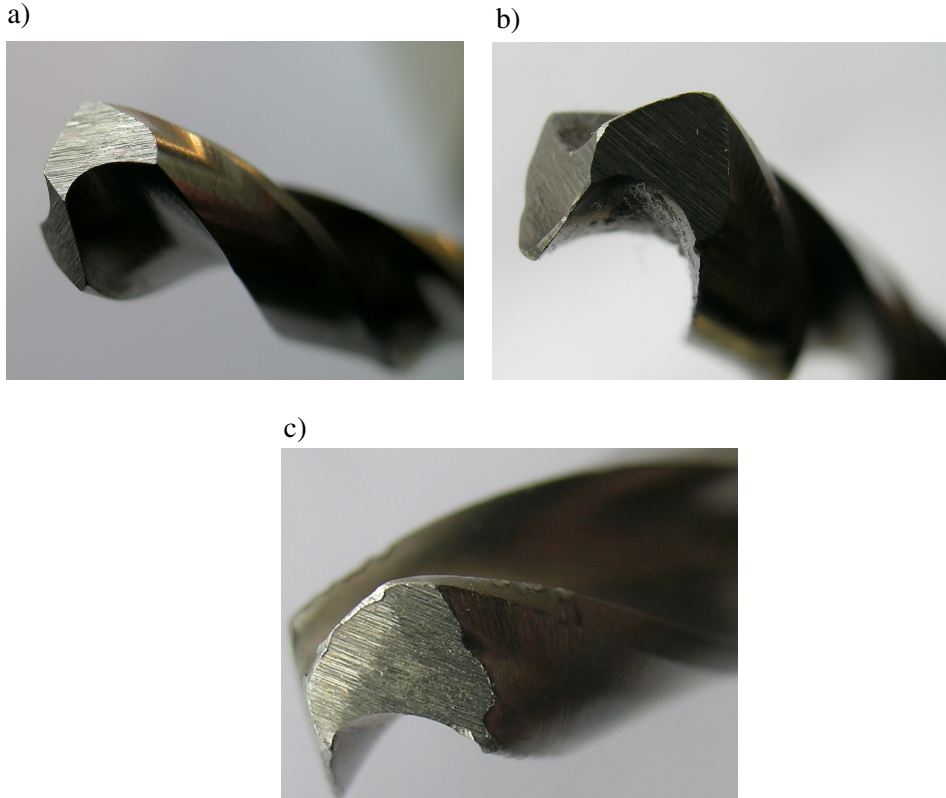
Cutting edge of surgical drills: a) an initial state, b) cutting edge of the 1st drill after the wear tests, c) cutting edge of the 2nd drill after the wear tests
